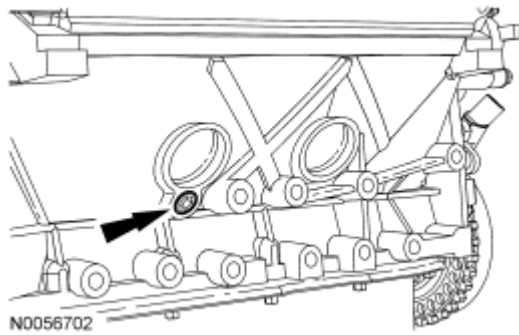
Locating Cylinder Block Coolant Drain Plugs
